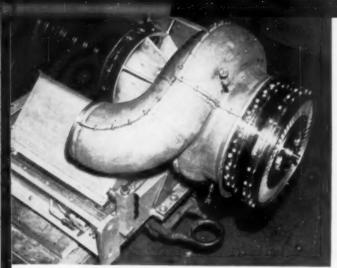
Two bolted easings of the Solar "Jupiter" turbine (at right of photograph) were combined into one casting, with substantial savings in machining, assembly and fastener costs.
